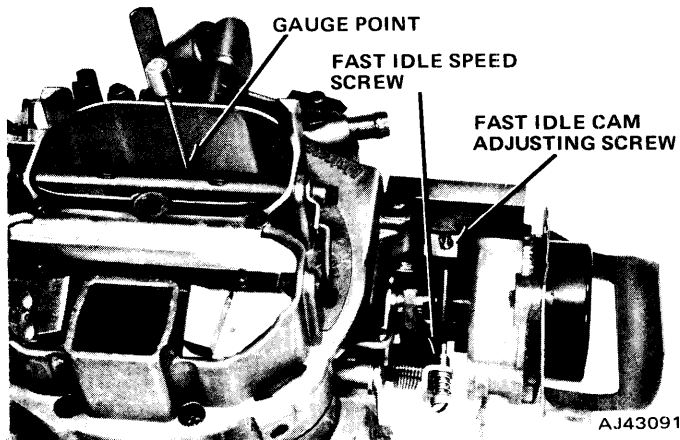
Fast Idle Cam Linkage Adjustment
